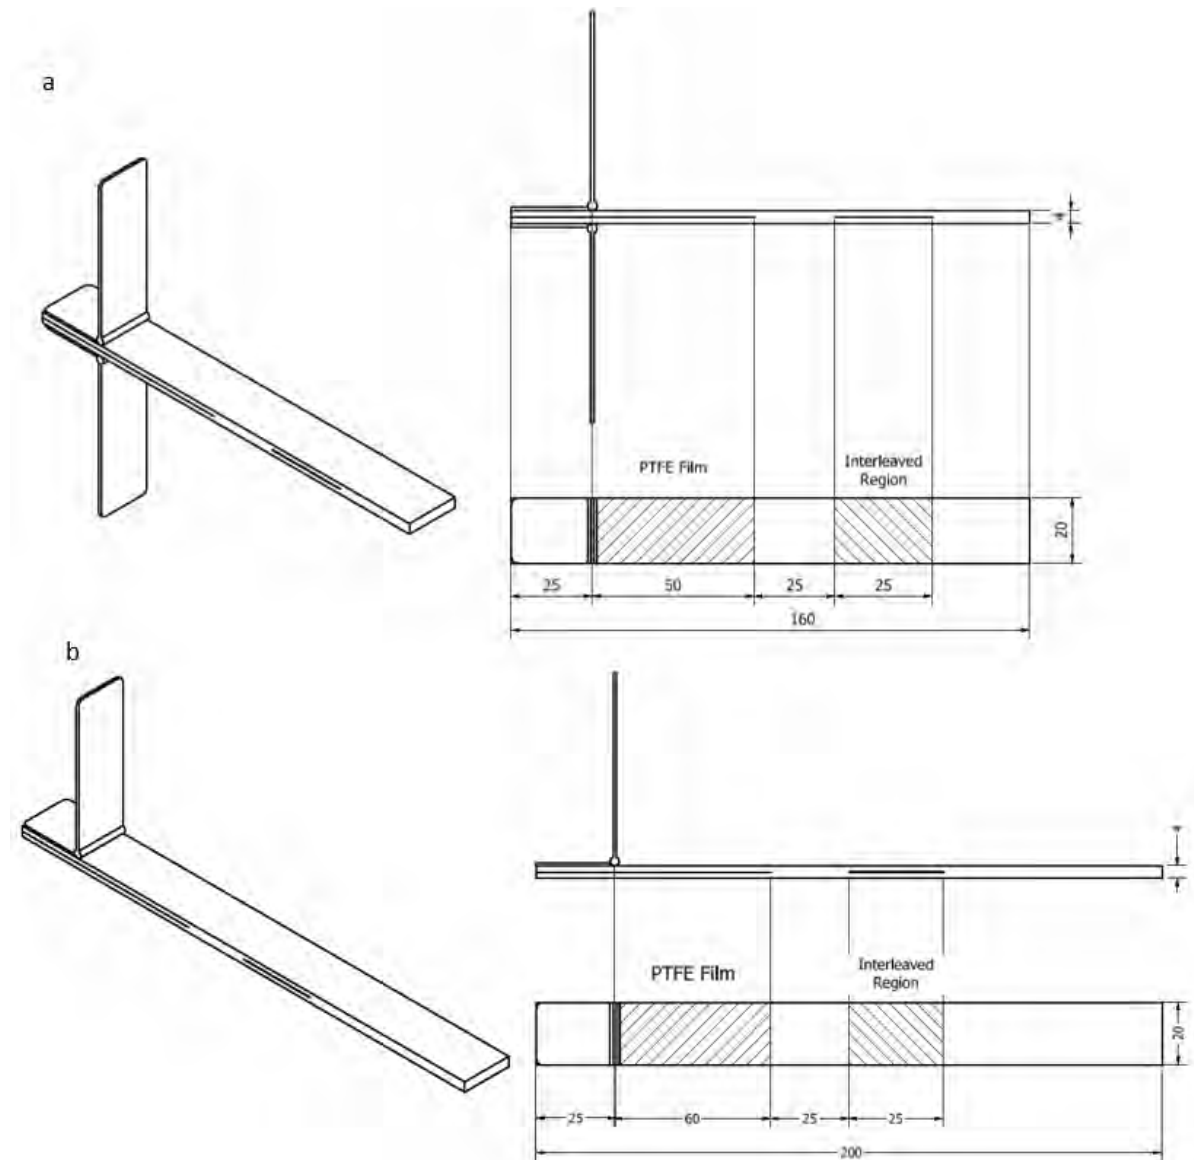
Geometric dimensions of (a) the interleaved DCB specimen and (b) the interleaved ELS specimen (all dimensions in mm).
